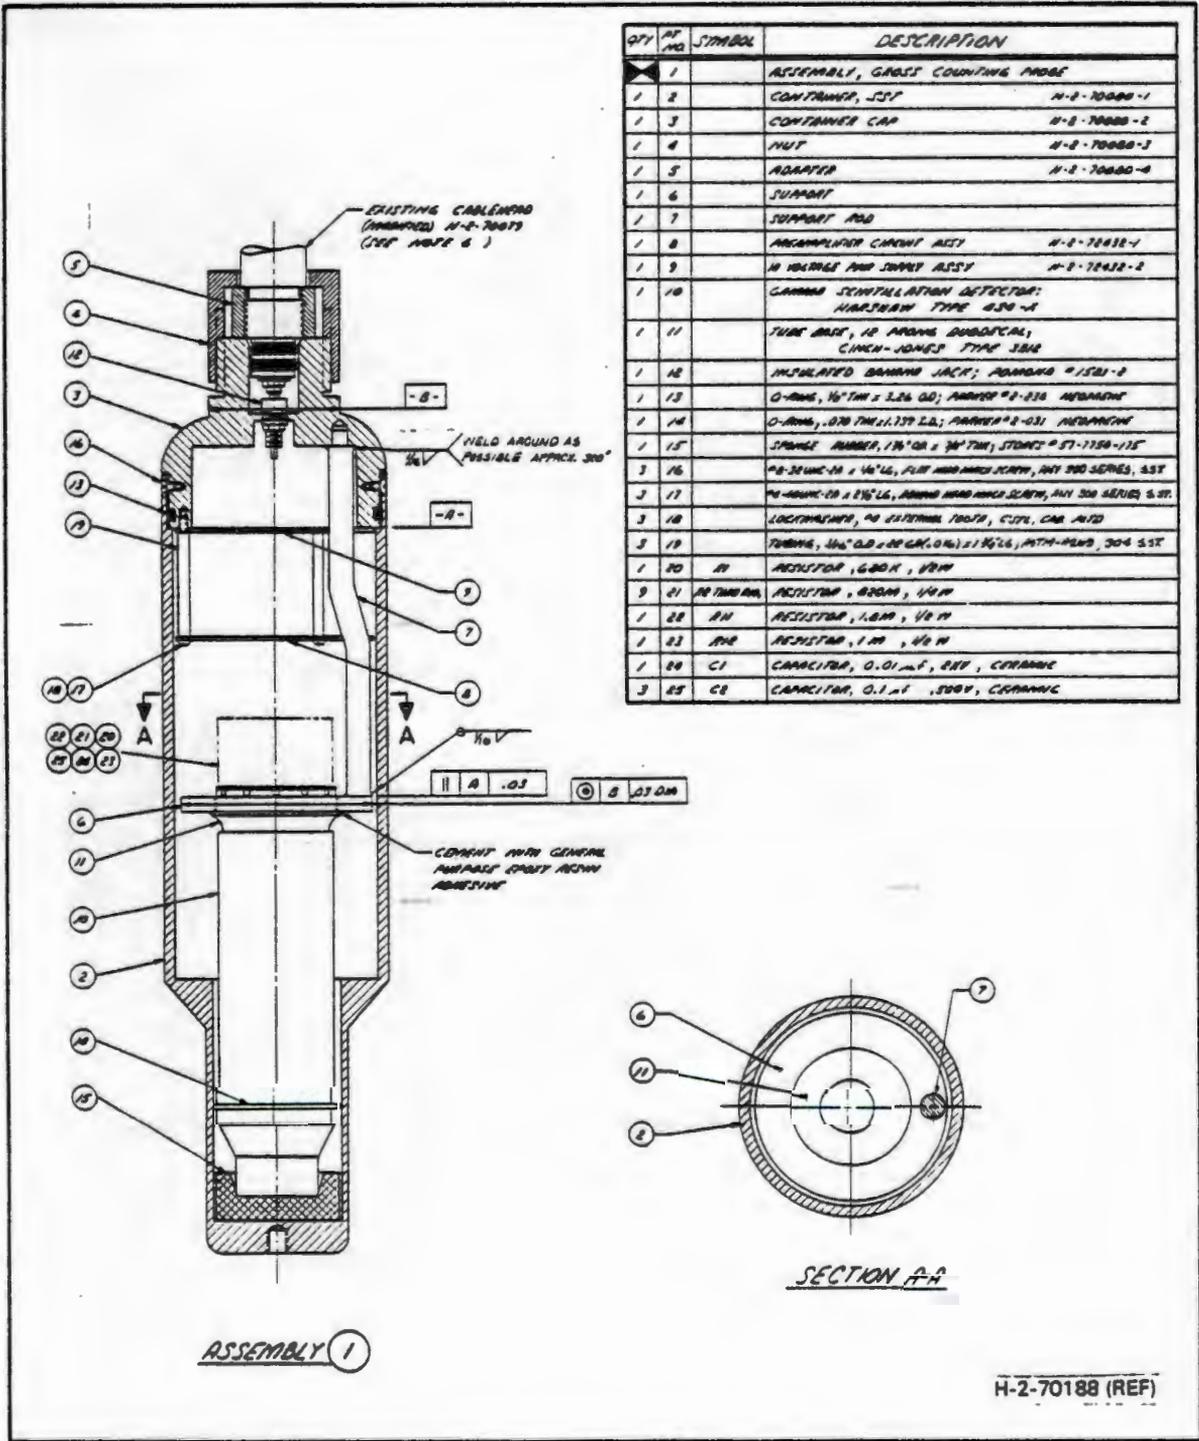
Gross Counting Scintillation Probe Assembly.
